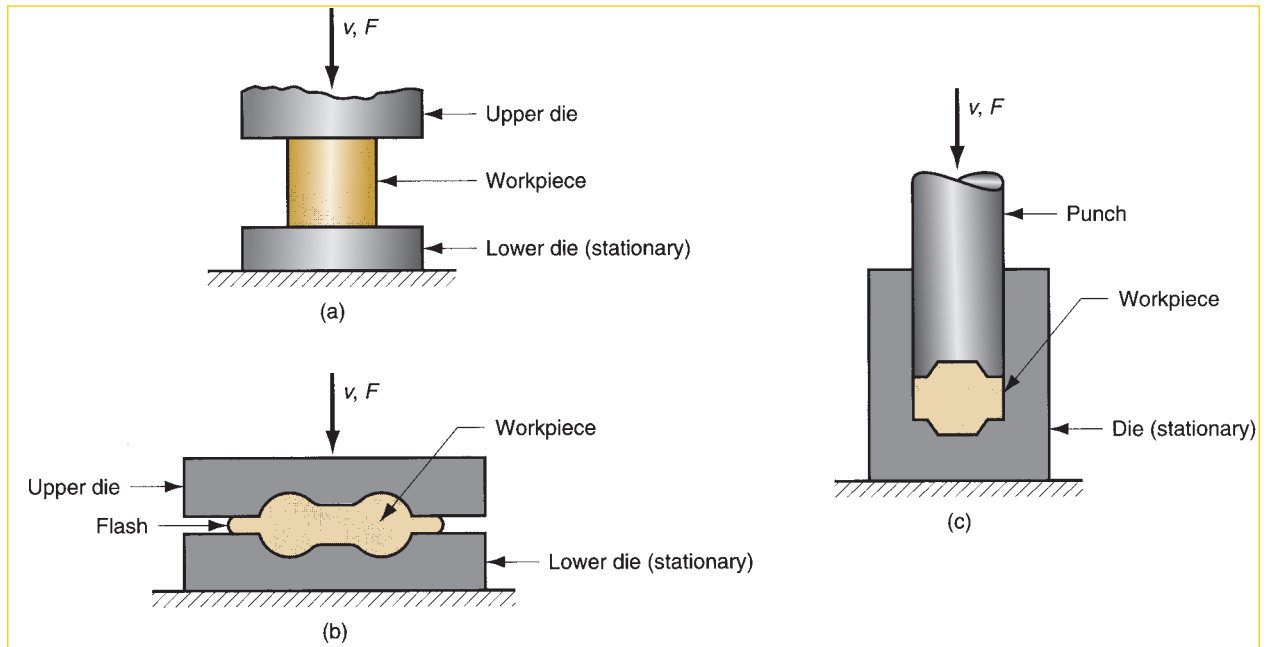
Three types of forging operation illustrated by cross-sectional sketches: (a) open-die forging, (b) impression-die forging, and (c) flashless forging.
